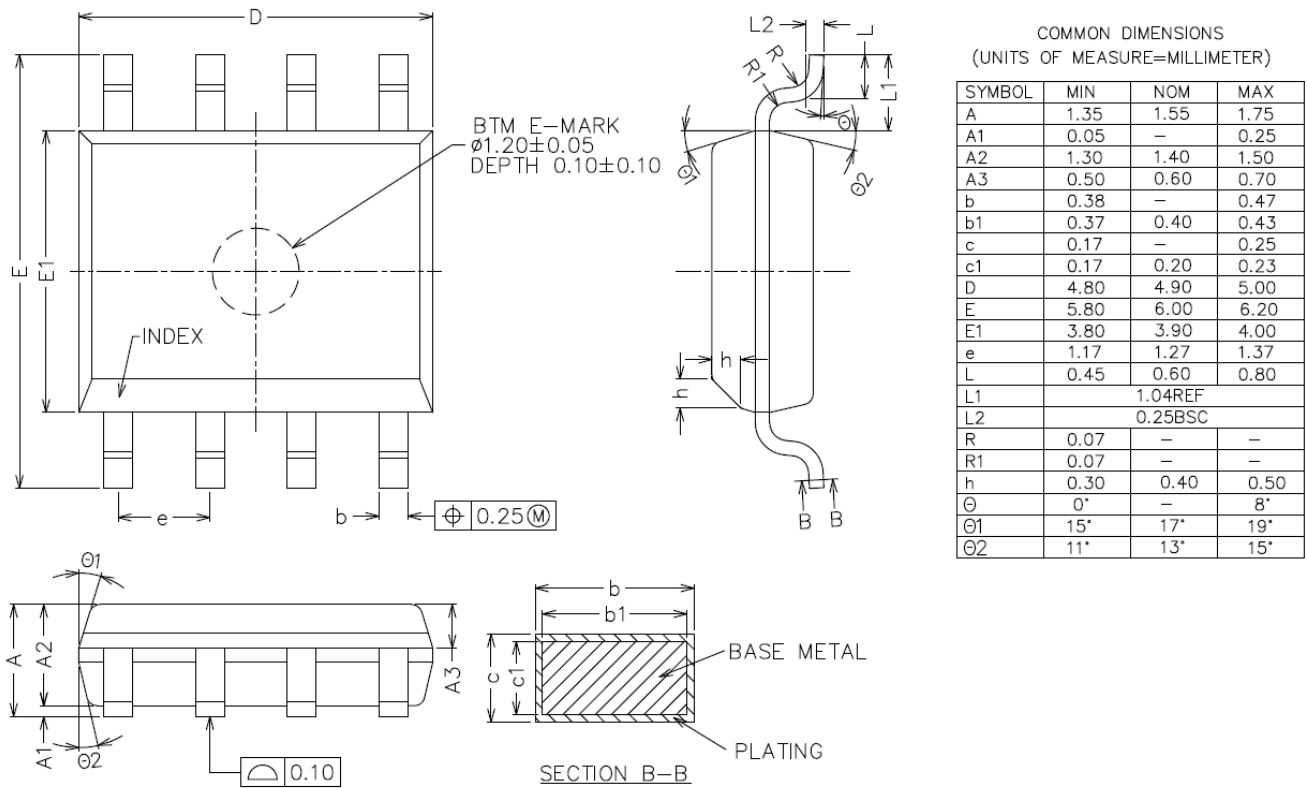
SOP8 Package Shape and Dimension in millimeters
